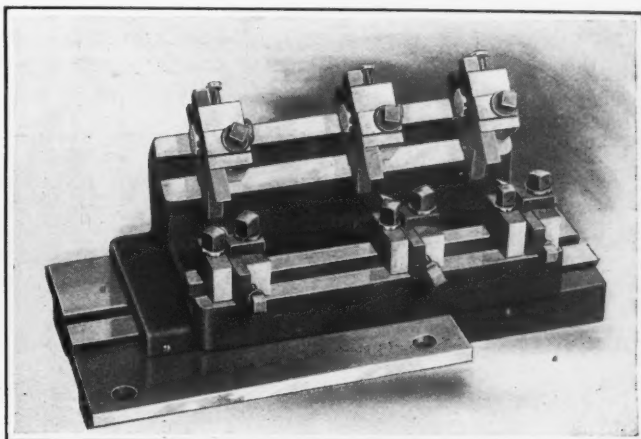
Finishing Slide for handling Long Turning Operations on Gridley Automatic Turret Lathe
